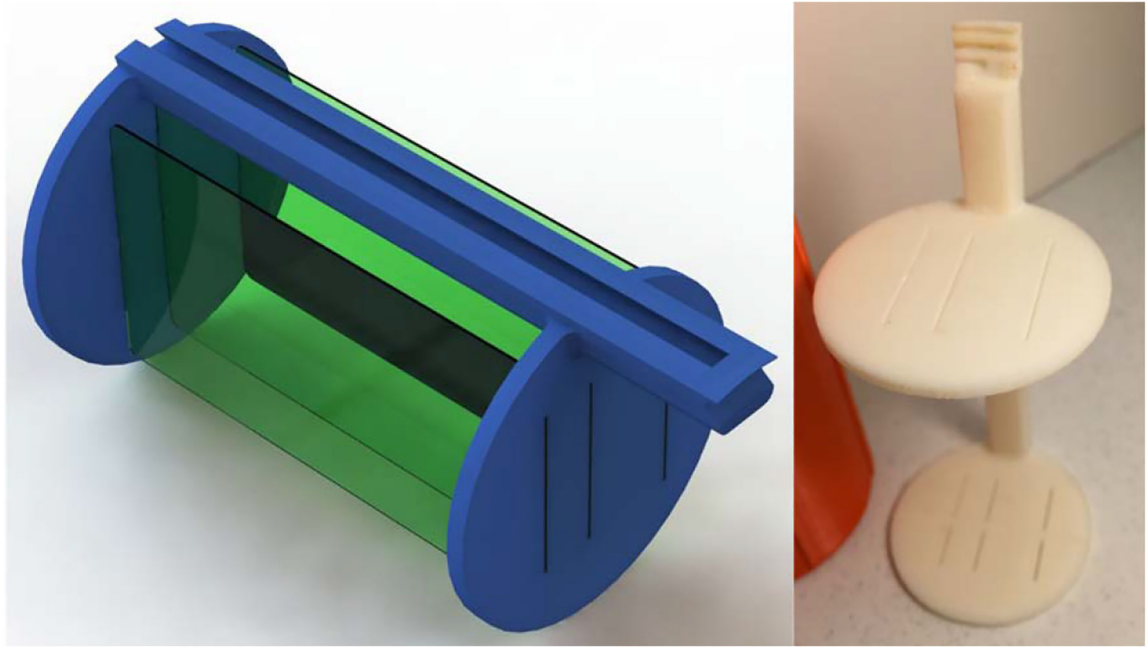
CAD image (left) and printed prototype (right) of the coronal-sagittal film holder, version 4. The overall height of the holder is 12.54 cm. The diameter of the circular frames is 6.0 cm.
